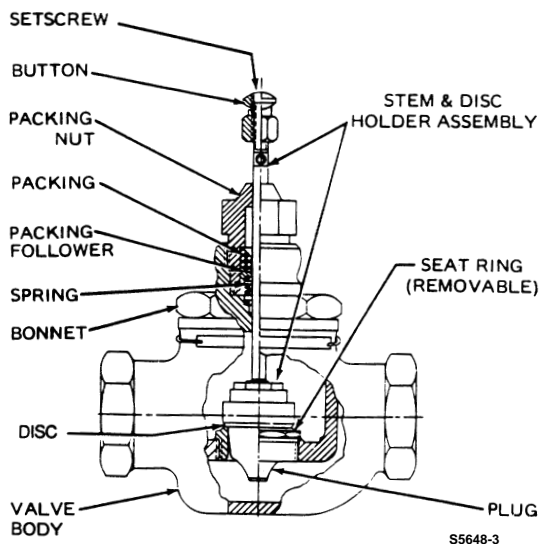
V5011A, C, F, and G Direct Acting Threaded Body Valve—Cutaway.
